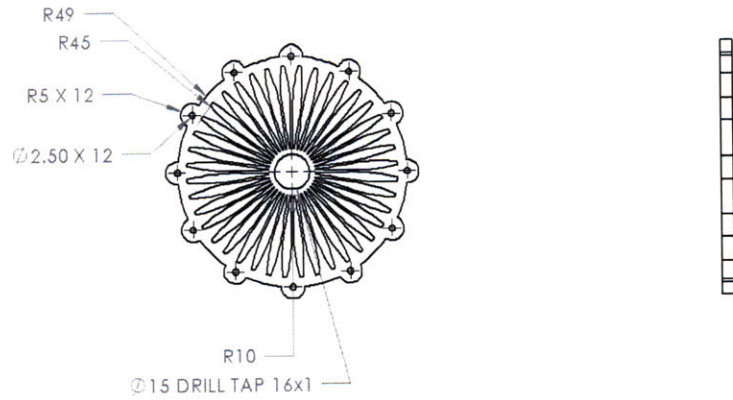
A CAD drawing of the BEAU's flexure with relevant dimensions.
